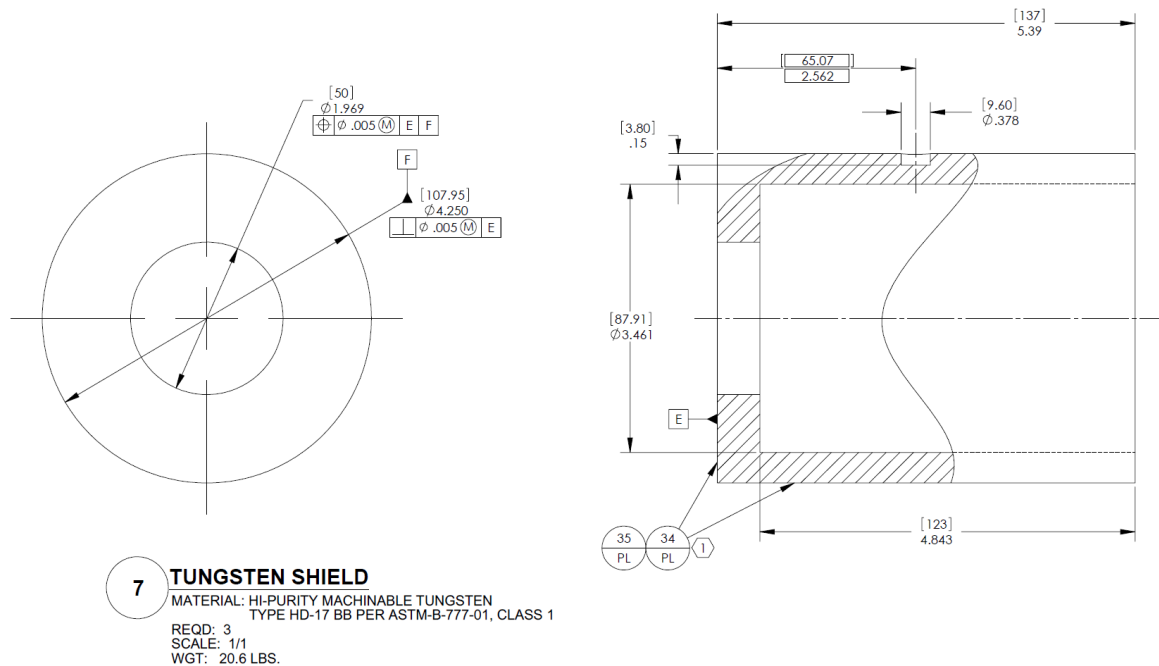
IPCA2 drawing of tungsten shield containing HPGe detector.
